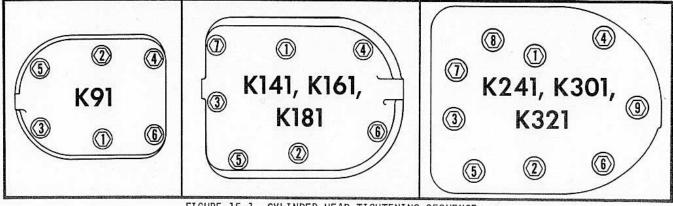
CYLINDER HEAD TIGHTENING SEQUENCE
